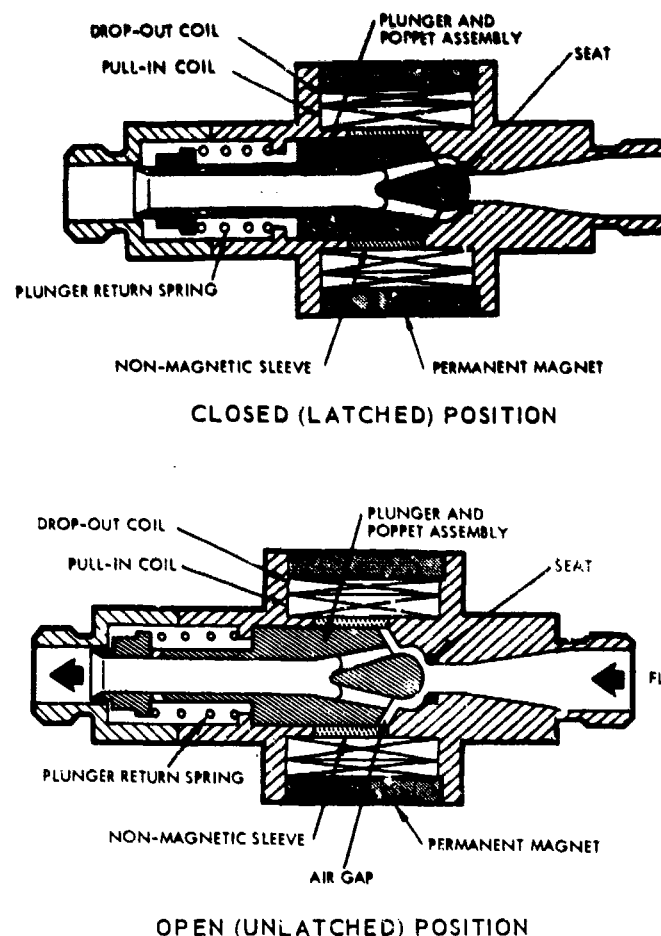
Dual Coil, Single Magnet Magnetic Latching Solenoid Valve
